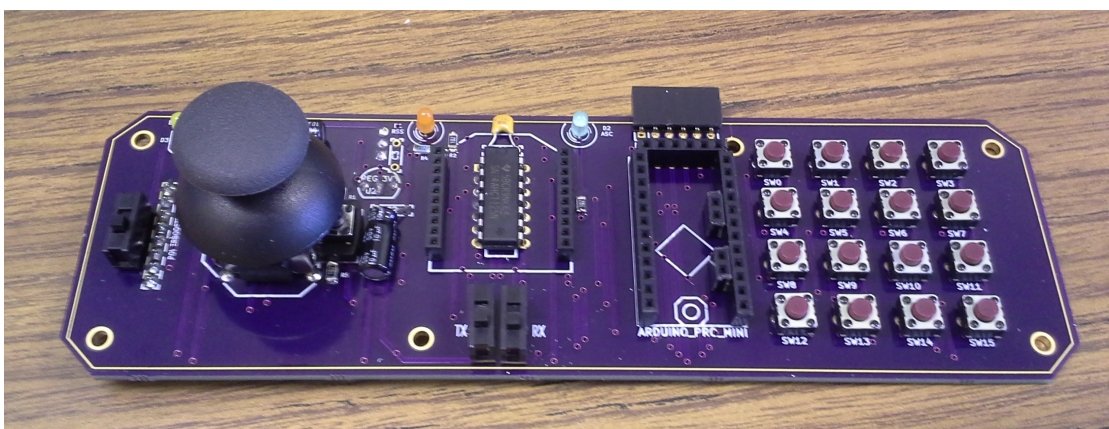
Custom circuit board of Remote Command Unit. Only soldered components, including headers for Arduino and XBee modules, are visible.
